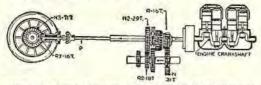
Low or first gear. Note that the drive is from the crank shaft to the drive gear (R), to the driven gear (N), to the driven gear (R2), to the driven gear (R3), to the driven gear (N3).
